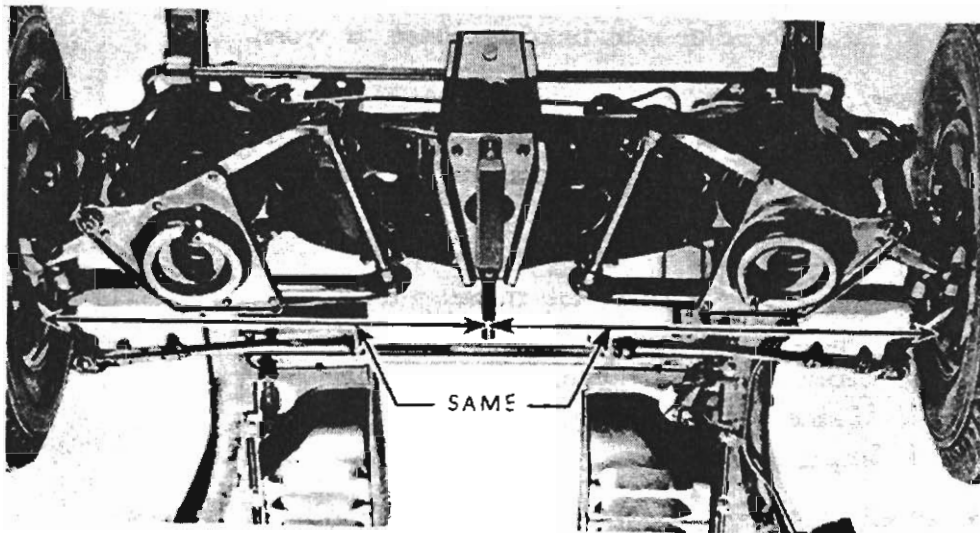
Measure from the Mark on the Arm of the Gauge to Each Front Wheel Brake Support Plate.
